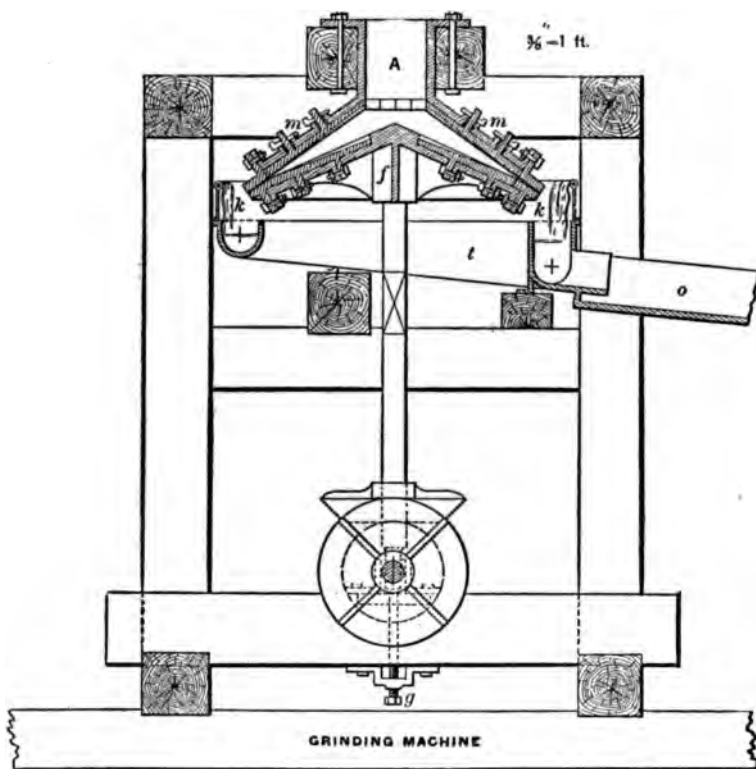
LUMP-GRINDING MACHINE, ELEVATION.
